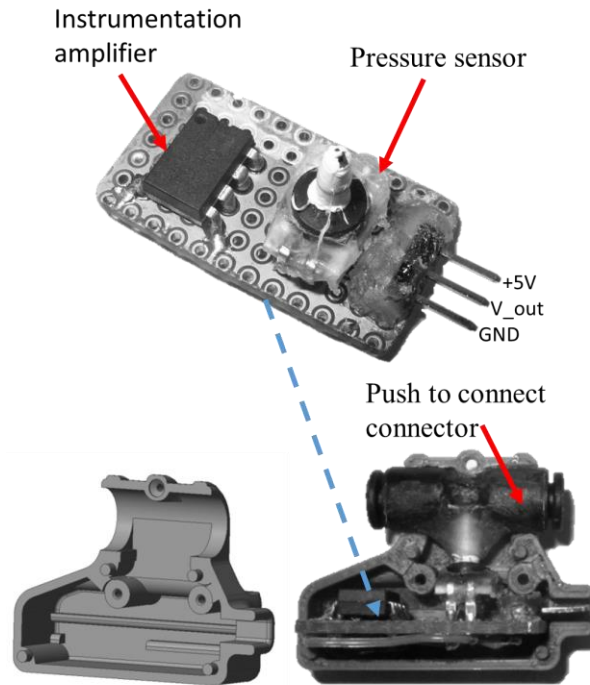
(A) PRESSURE SENSOR BOARD, (B) 3D CIRCUIT HOUSING MODEL, AND (C) HOUSING WITH CIRCUIT BOARD AND PUSH TO CONNECT CONNECTOR
